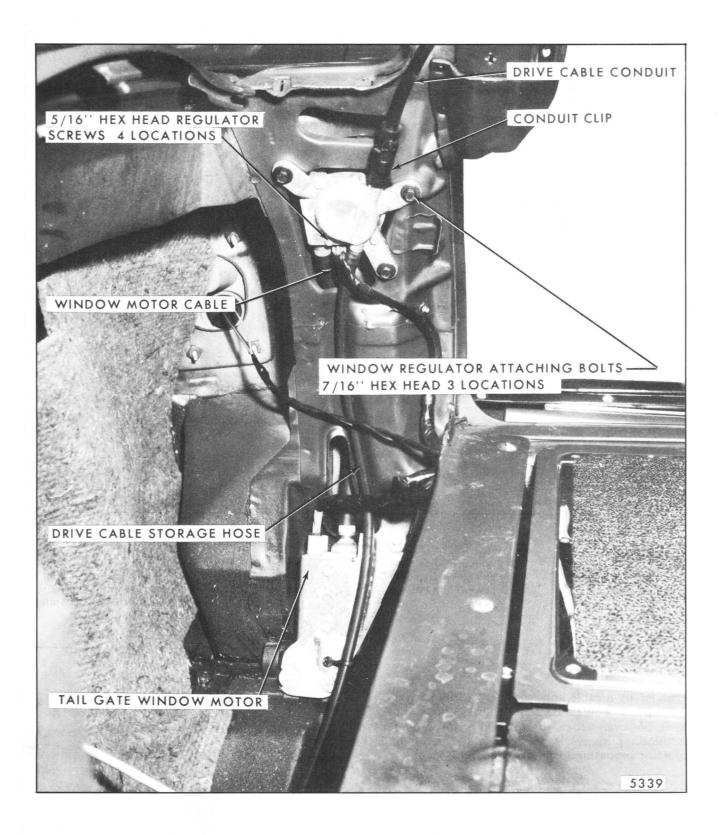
Tailgate Window Motor and Regulator Installation
